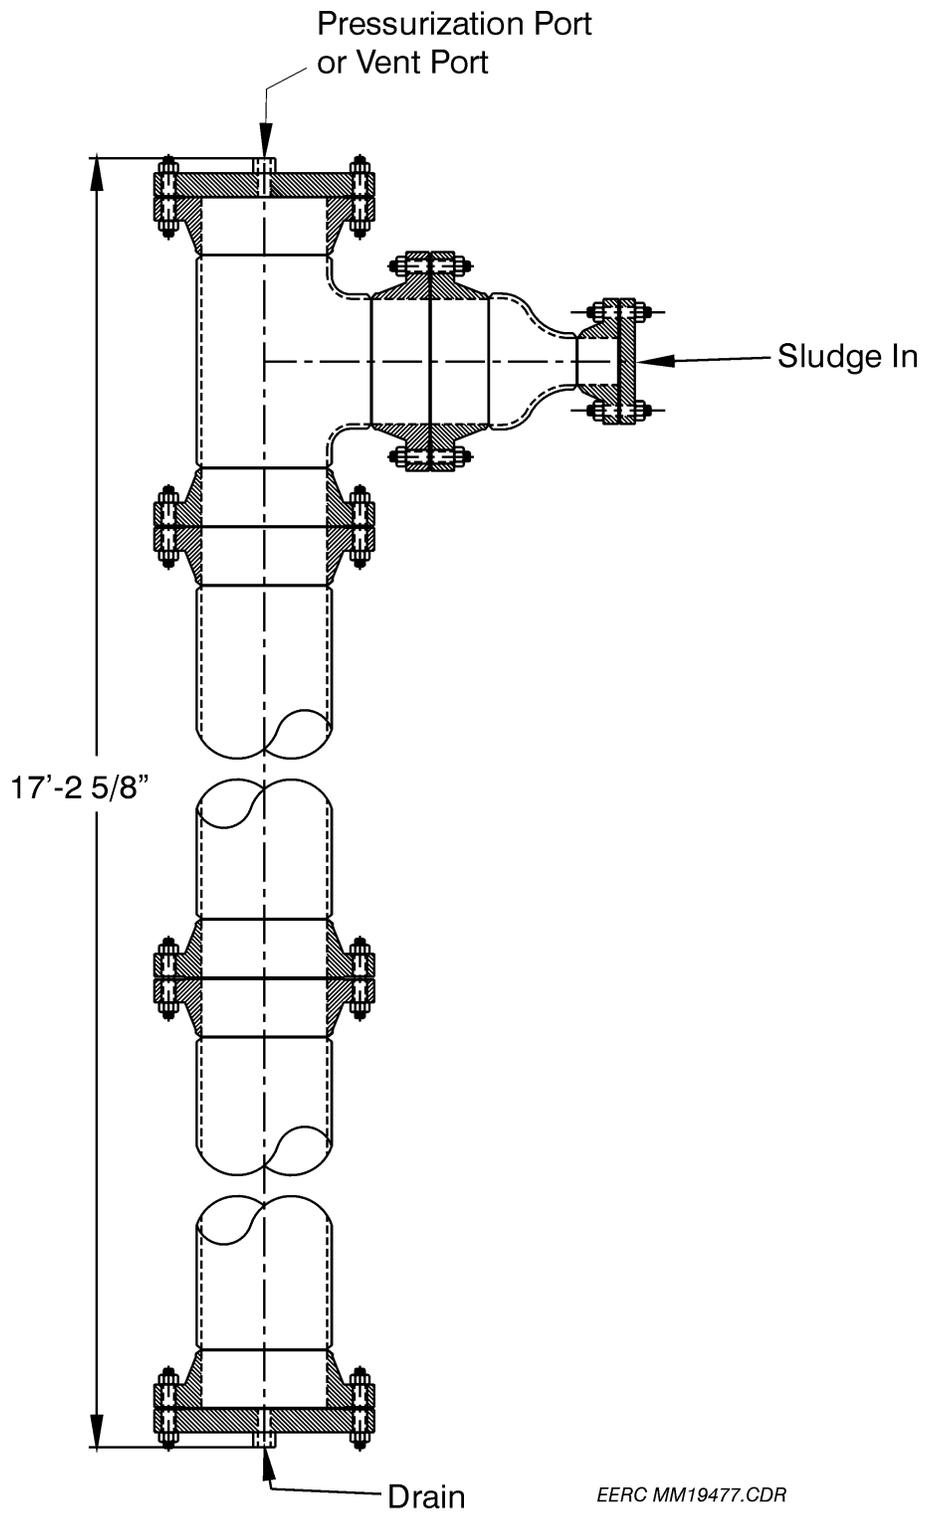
Pressure piping system for elevated-pressure sludge pump testing.
